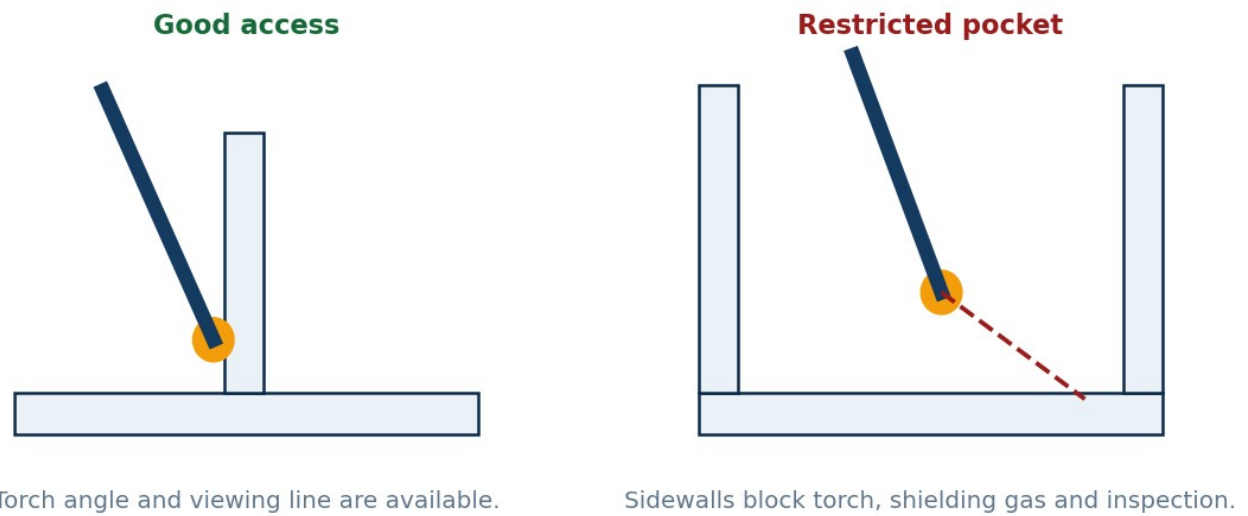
Deep pockets and narrow gaps restrict torch angle, viewing, gas coverage and inspection.
